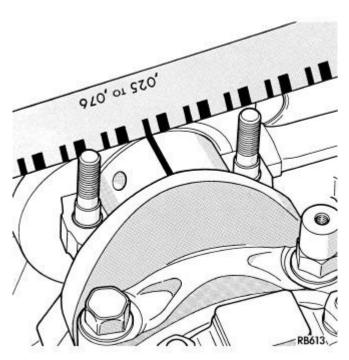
Checking Connecting Rod Bearing Clearance-Typical
